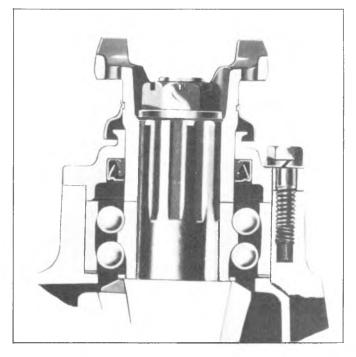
B-41-Pinion Oil Seal-12-1/4" Axle
